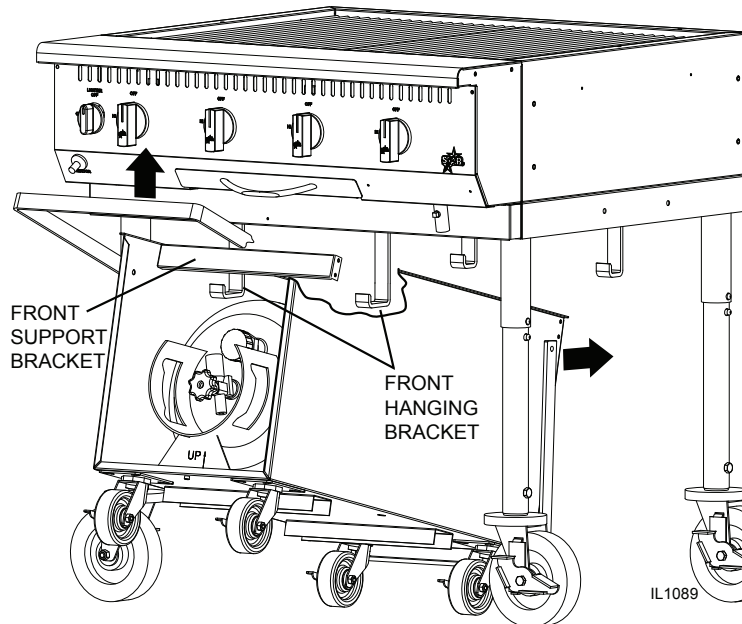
, (Above) Lock Wheel Casters when using grill & before mounting tank caddy
